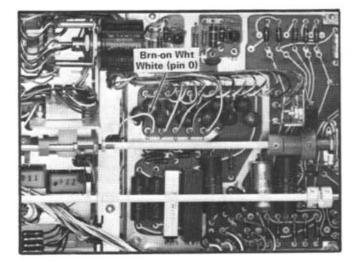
Partial view of Output board showing the Vc input wire and the Vc output pin connector location.
